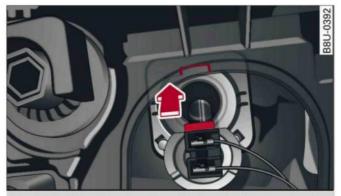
Wheel housing liner: Fitting plastic connector for dipped headlight
